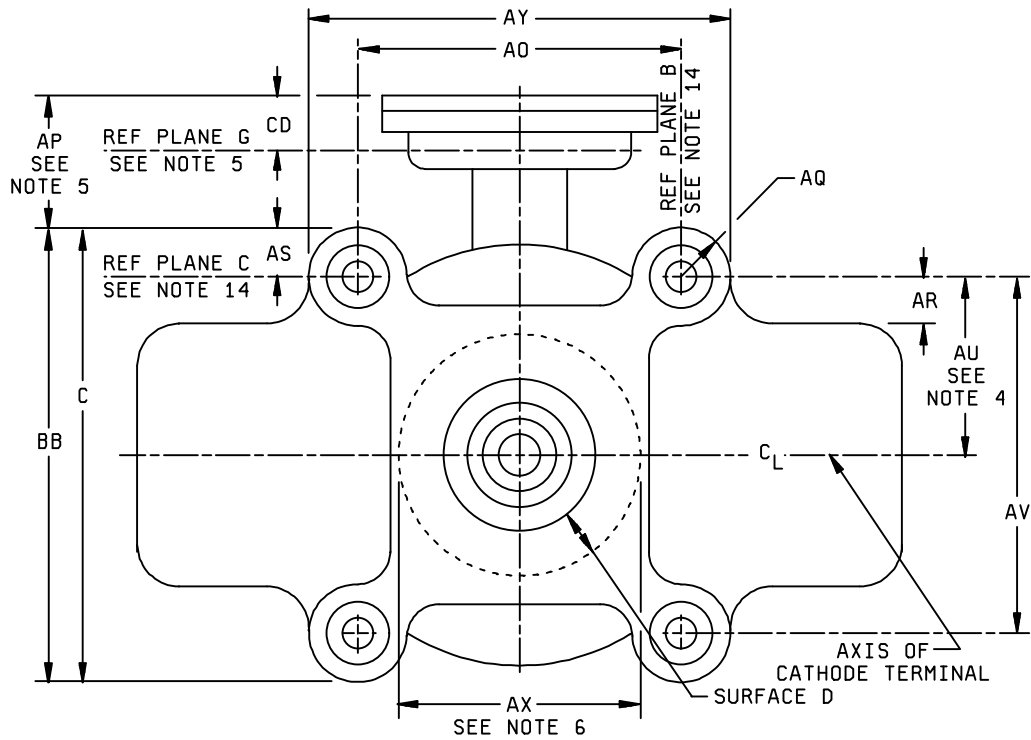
Outline drawing of electron tube type DOD-042 (bottom view).
